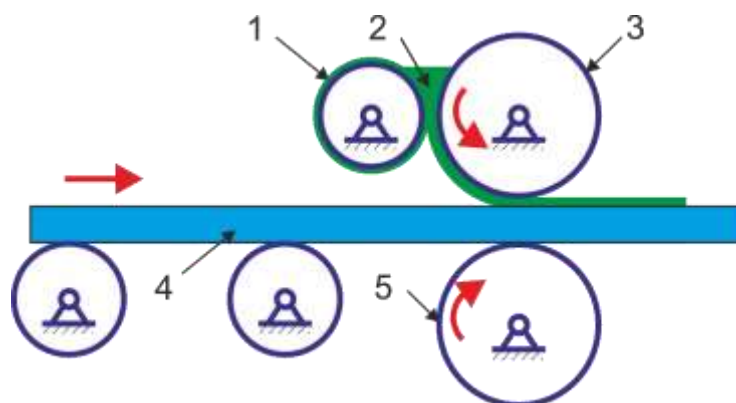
Principle of roller coating, 1 - container, 2 - ink, 3 - application roller, 4 - glass, 5 - transport roller
